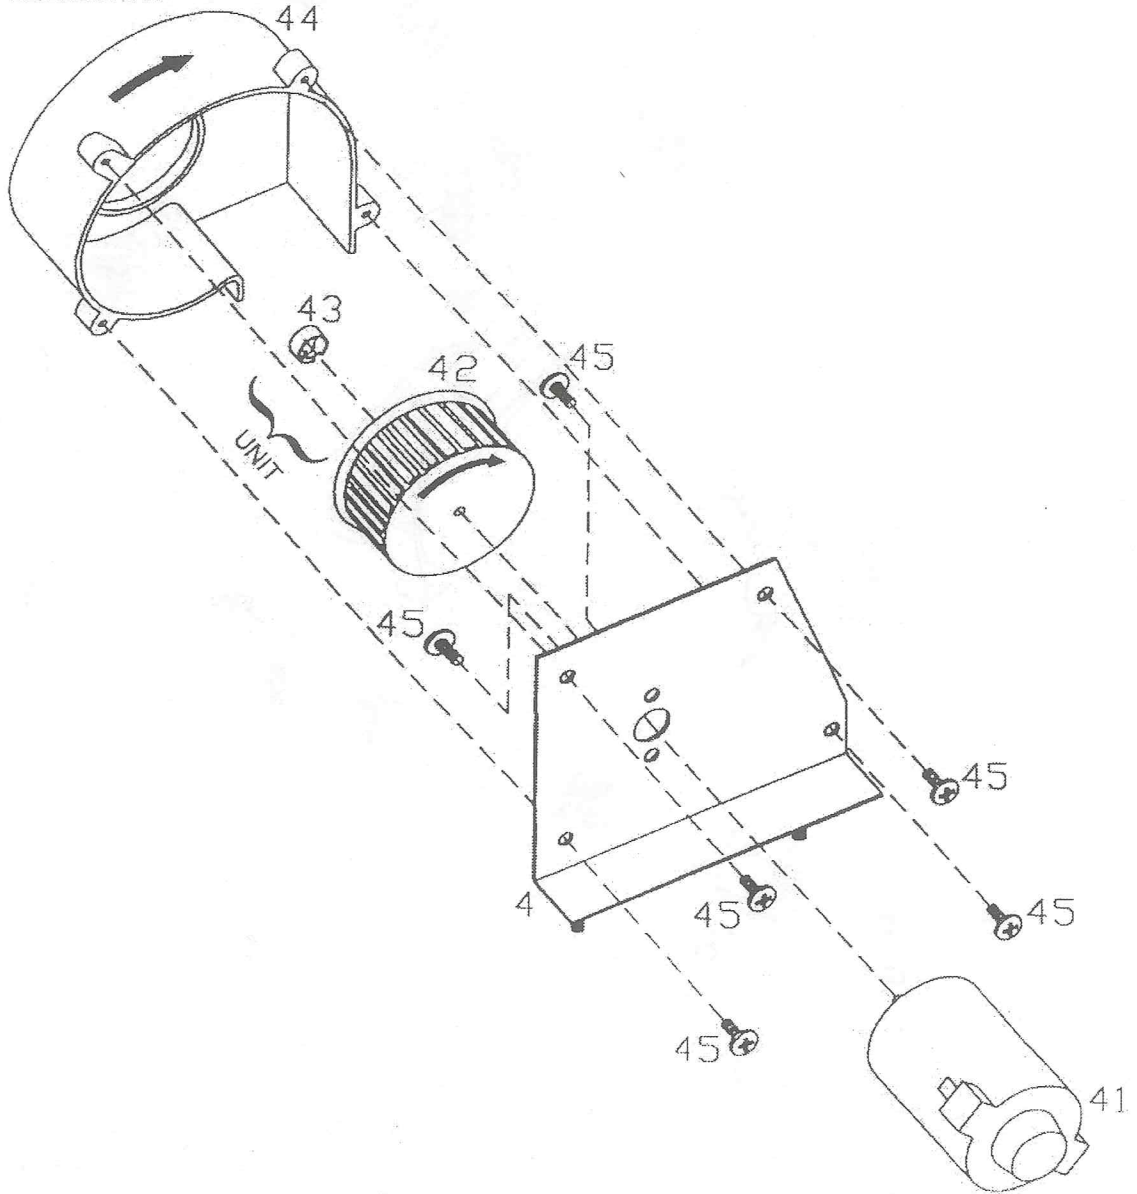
COMBUSTION FAN ASSEMBLY
